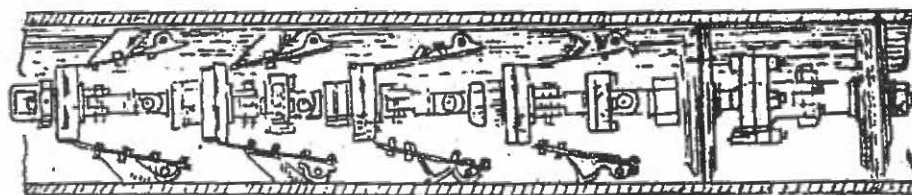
Hill-Hodgman Pipe Cleaning Machine. ✓
